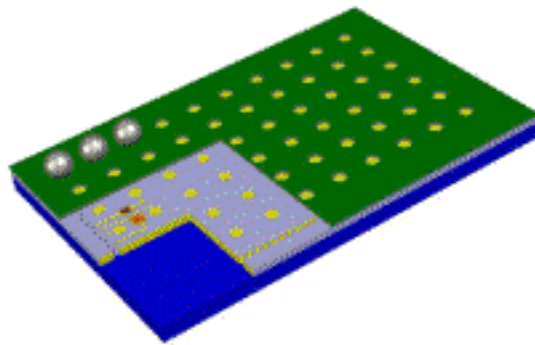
MCSP passive and active device integrated chip-scale package. Passive components are shown mounted on the light blue layer.
